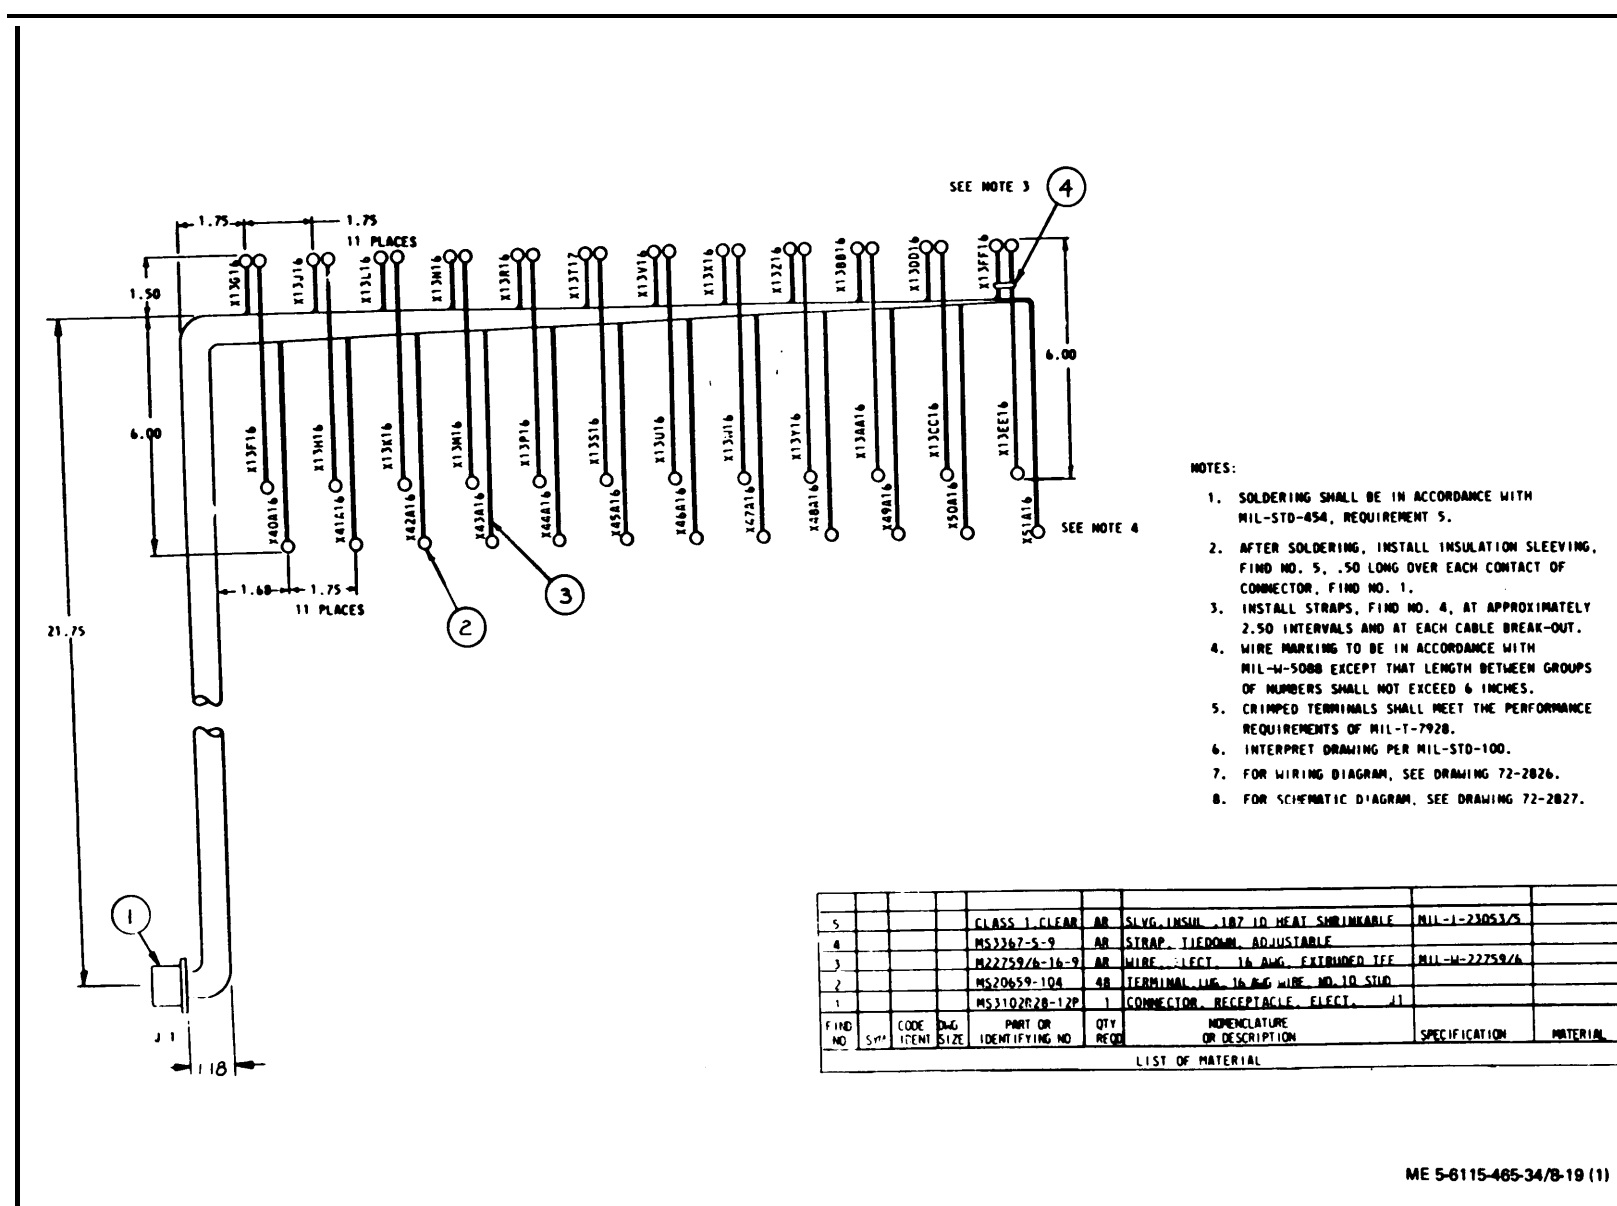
Load Bank Wiring Harness (Sheet 2 of 2), Drawing No. 72-2823
